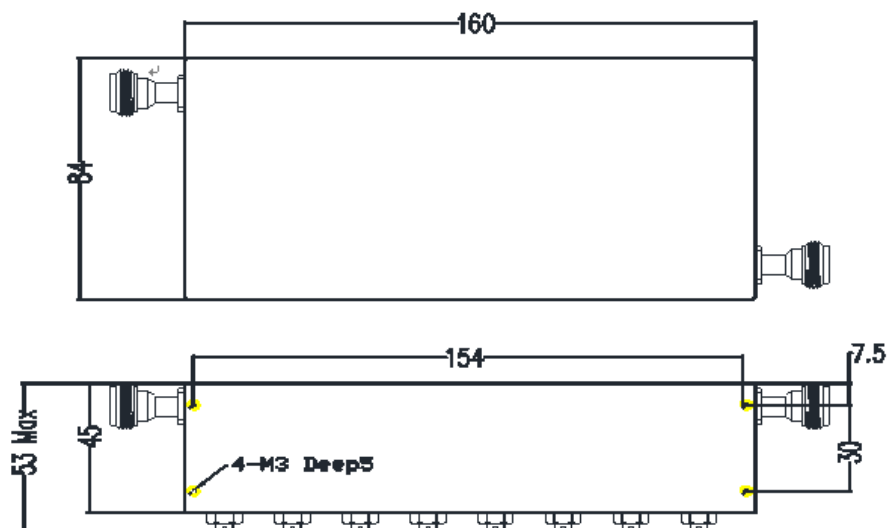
JX-BSF1-873M925M-50NF front panel layout
